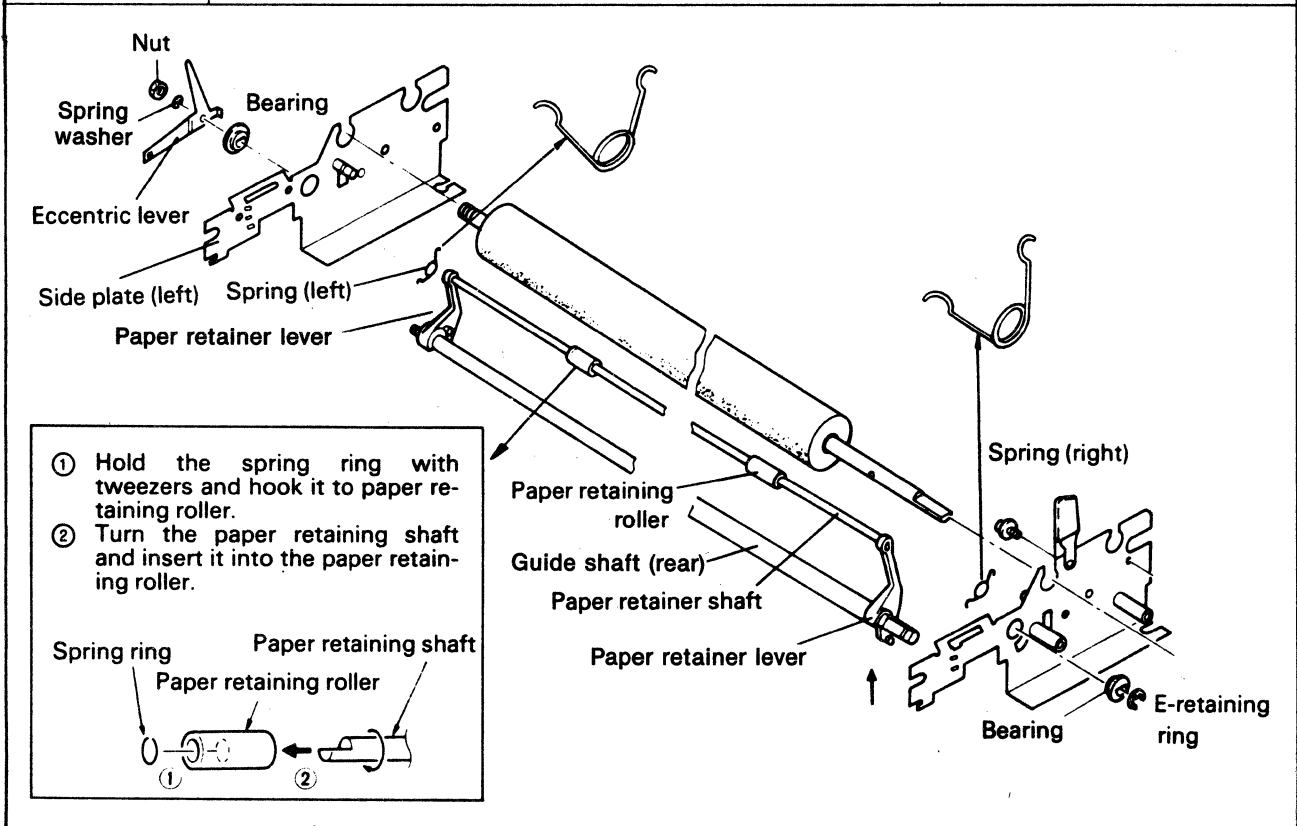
Paper Retainer and Carriage Guide Shaft Removal
